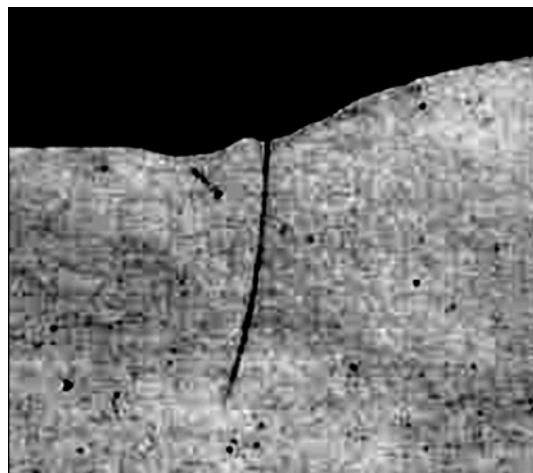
Side view of a specimen with fatigue crack formed in metal roll zone as a result of deviation from the weld peening technology
